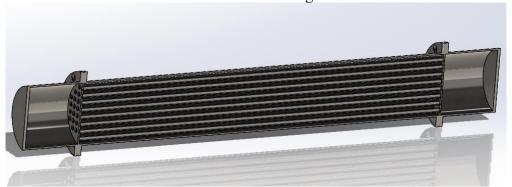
Sectional view of the shell and tube heat exchanger design with a total of 50 tubes.
